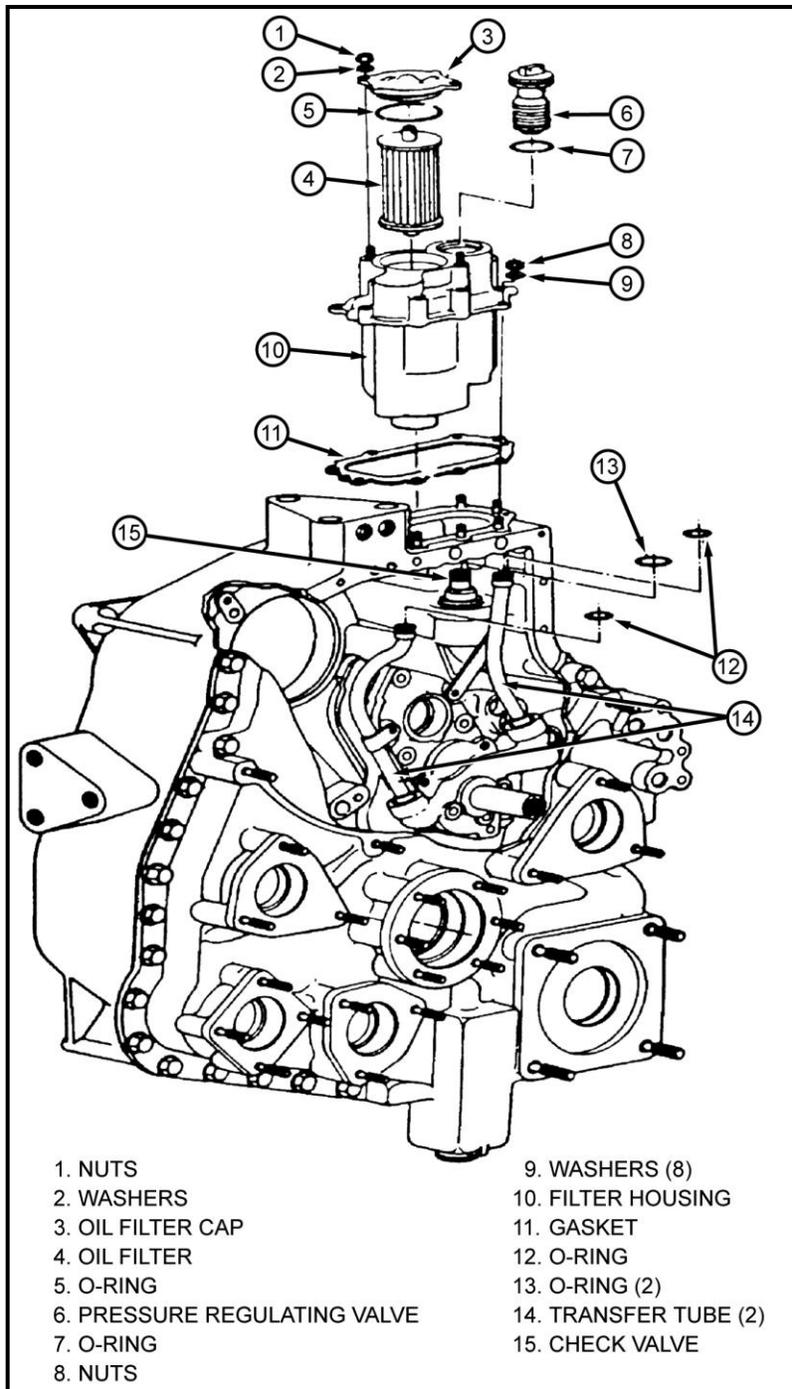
Oil Filter, Filter Housing, and Pressure Regulating Valve
